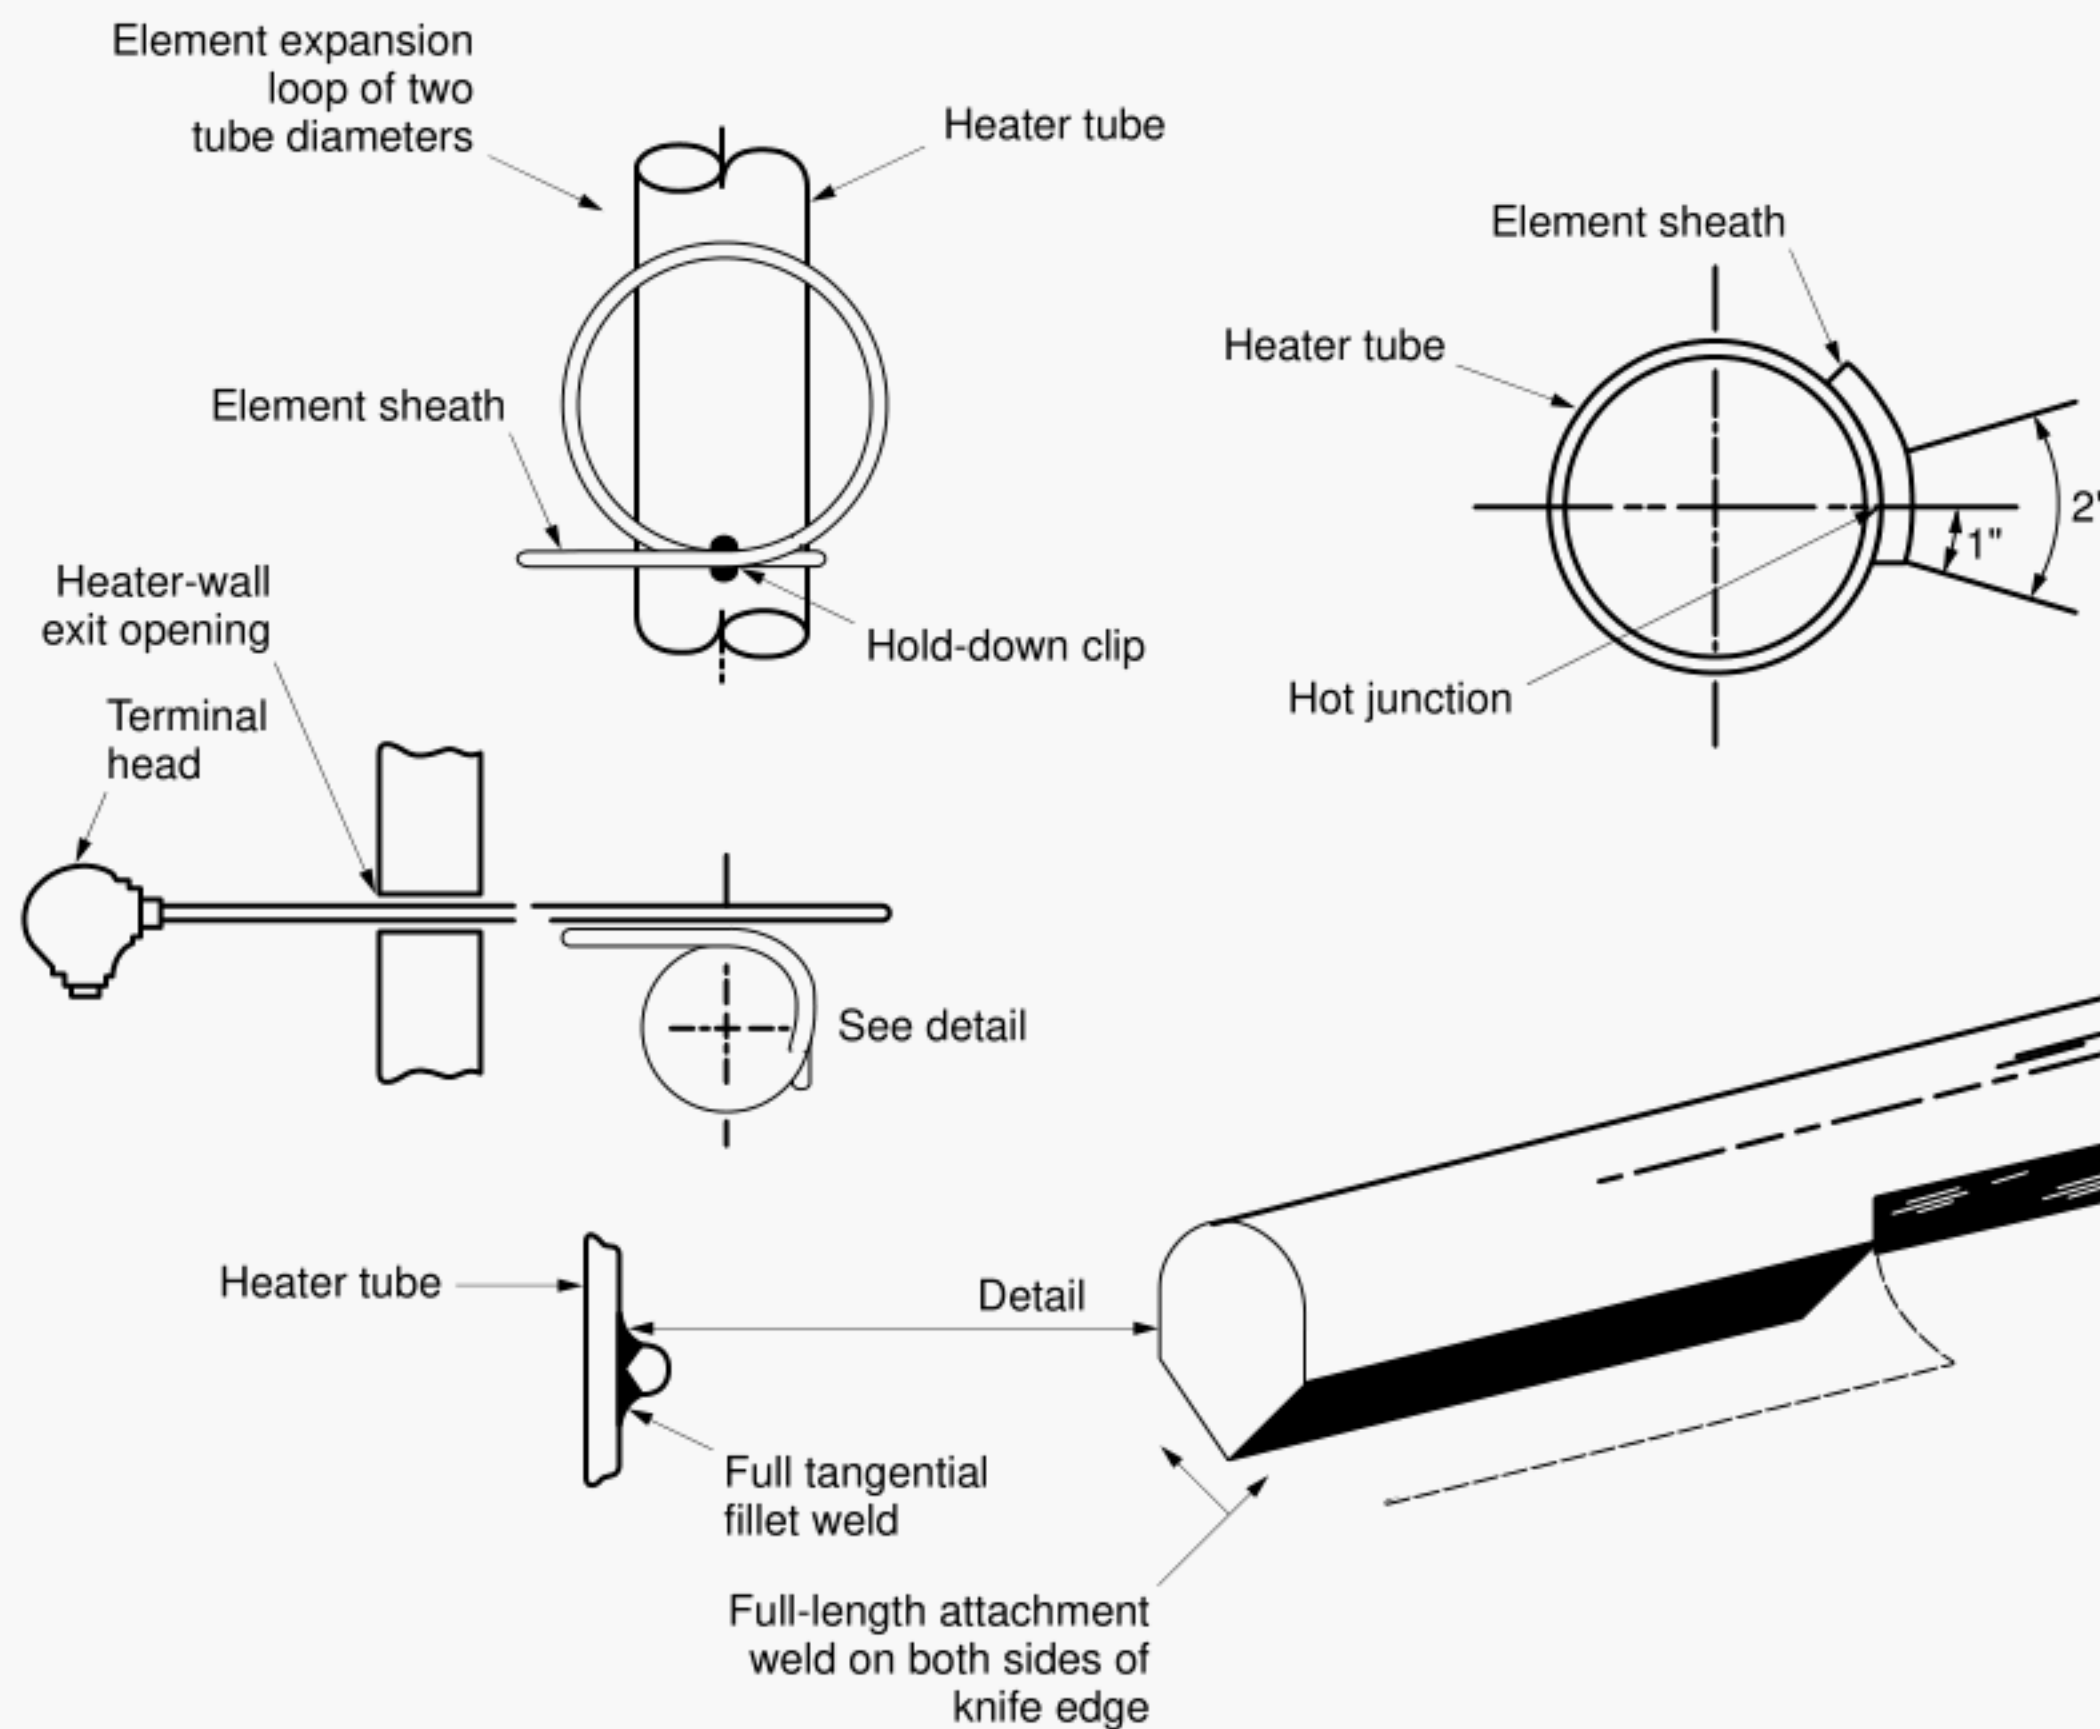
Knife-Edge Tube-Surface Thermocouple for Heater Tube
